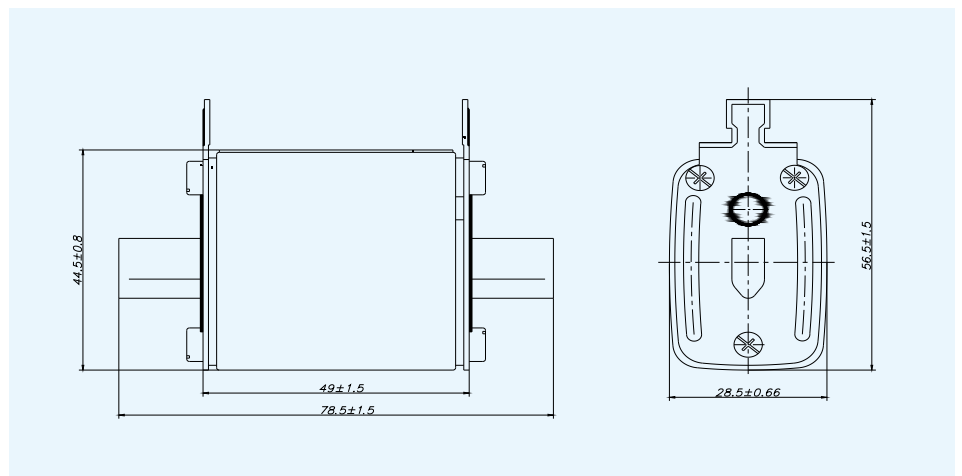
Overall dimensions of CRT36-00 600A fuse link
